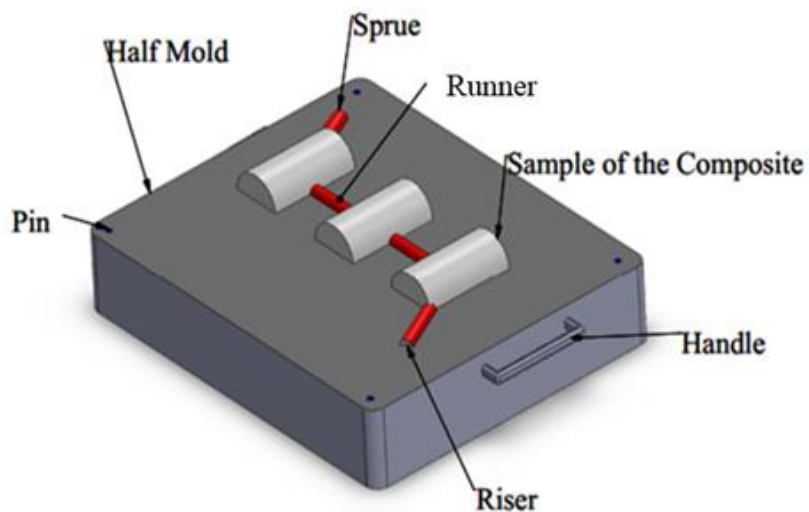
6. Sand Mould Box for Making Hardness Specimens
